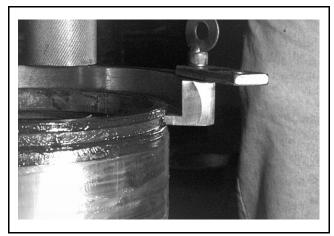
(MSSM0275AE) Shaft Sleeve Tool Details
